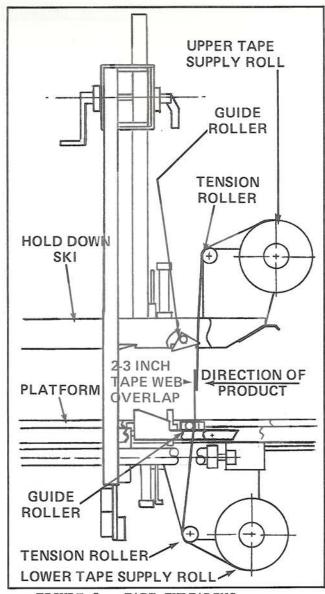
TAPE THREADING LEFT SIDE VIEW
